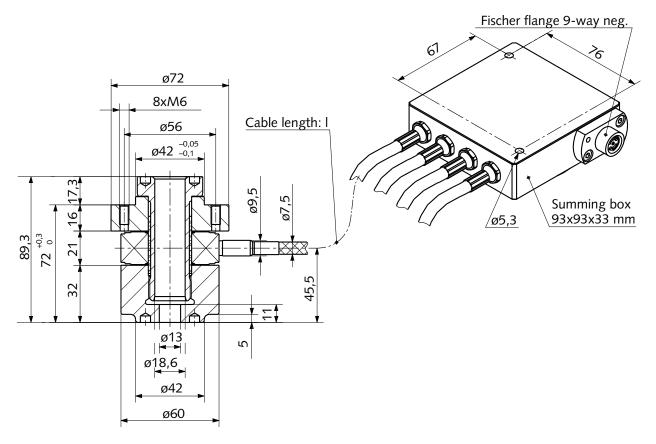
Dimensions of multicomponent force link set Type 9366CDsp
